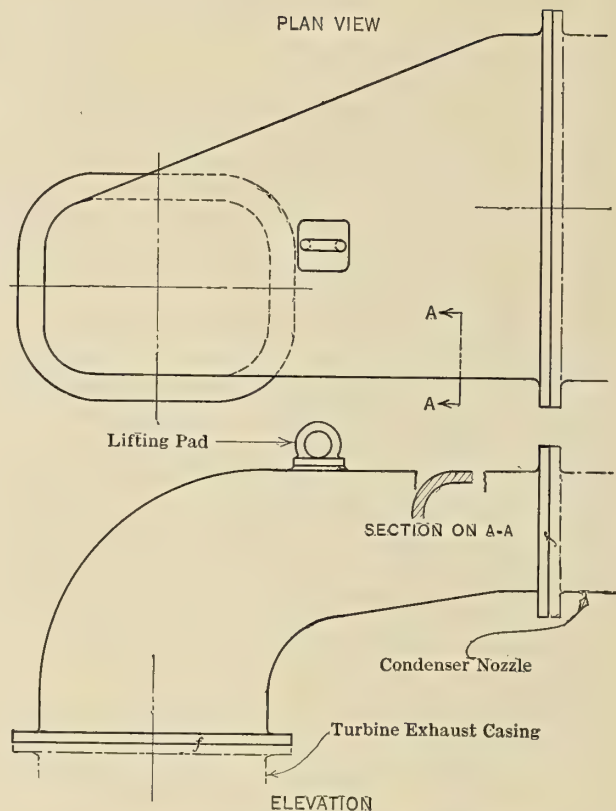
One-Piece Cast Iron Exhaust Pipe
